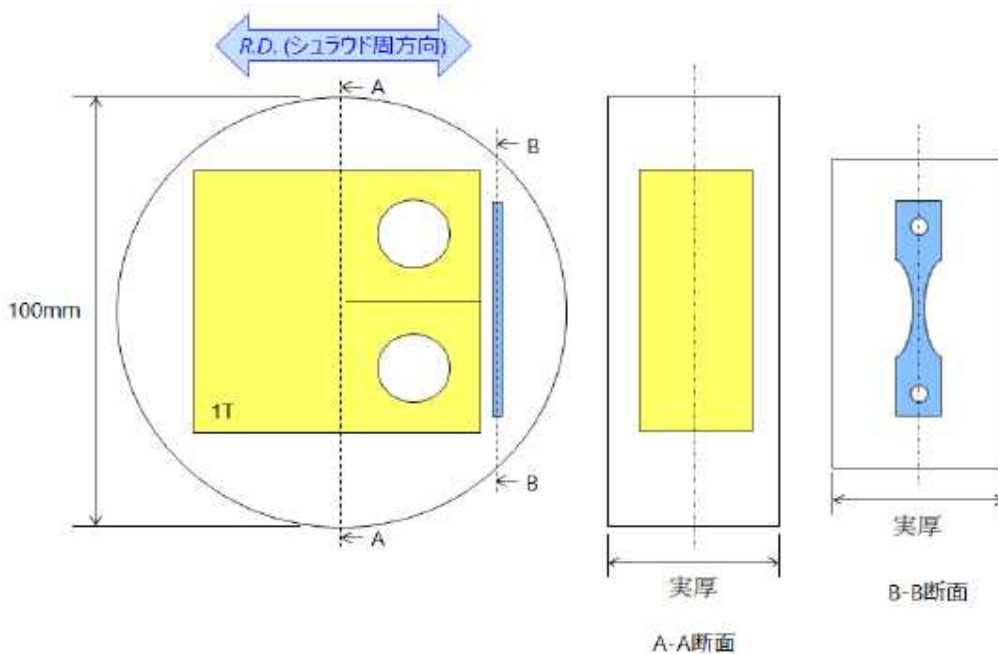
Plans for machining-out test specimens (top guide 100 mm x 100 mm specimen, 0.5T-C(T))
